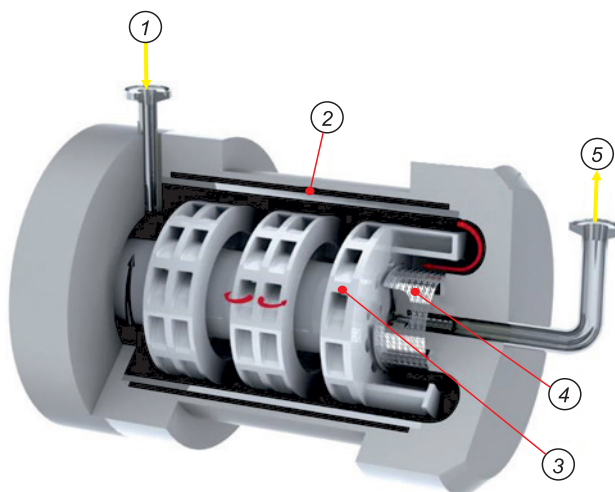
Diagram of a bead mill: 1 – cooling milling container with easy-to-replace grinding cylinder made of hardened or stainless steel, silicon carbide and zirconia, 2 – agitator disks made of stainless steel, hardened steel, zirconia, tungsten carbide, polyurethane and polyamide, 3 – product inlet, 4 – dynamic gap separator, 5 – product outlet, 6 – accelerators made of hardened chromium alloy, polyethylene oxide or zirconia
